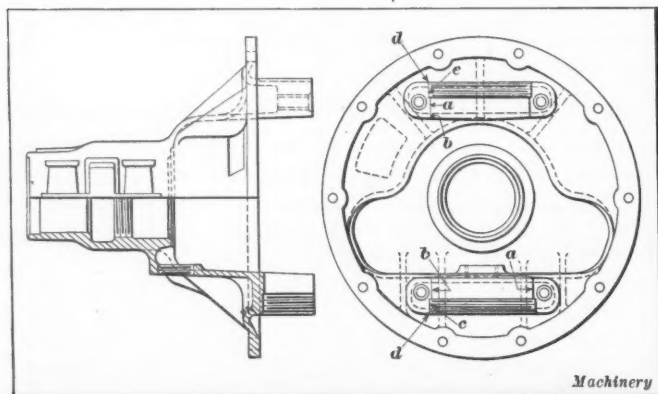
Automobile Differential Gear Housings machined by Tools shown in Figs. 1 and 2
